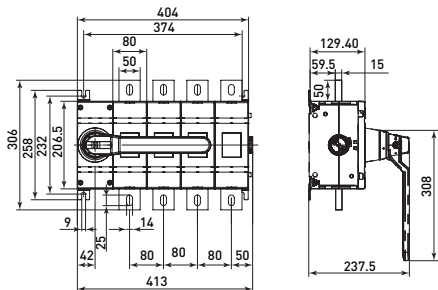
Overall and installation dimensions of 1000-1600 A 4P switch disconnectors
